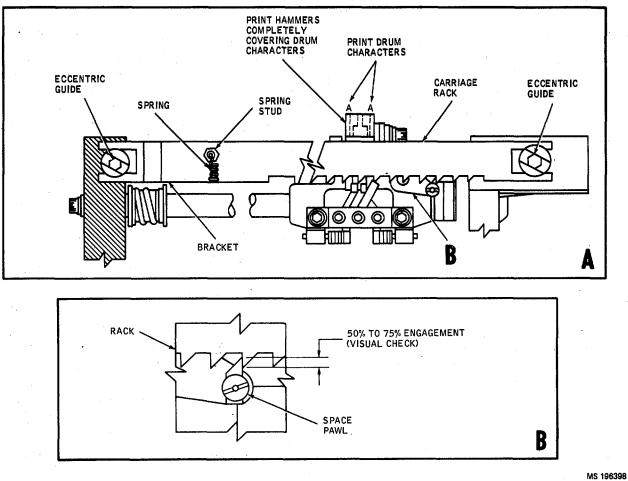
Space Pawl and Rack Clearance Adjustment
